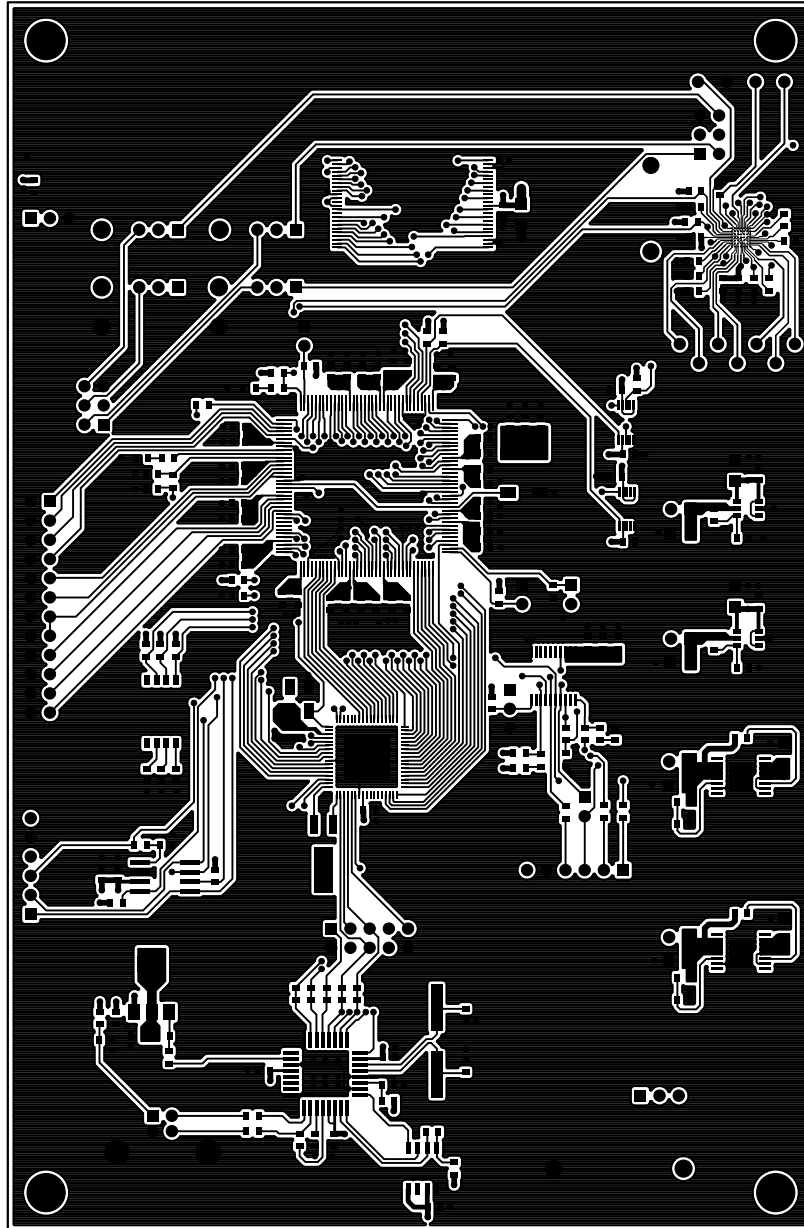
MAX44006 EV Kit PCB Layout—Bottom Side
